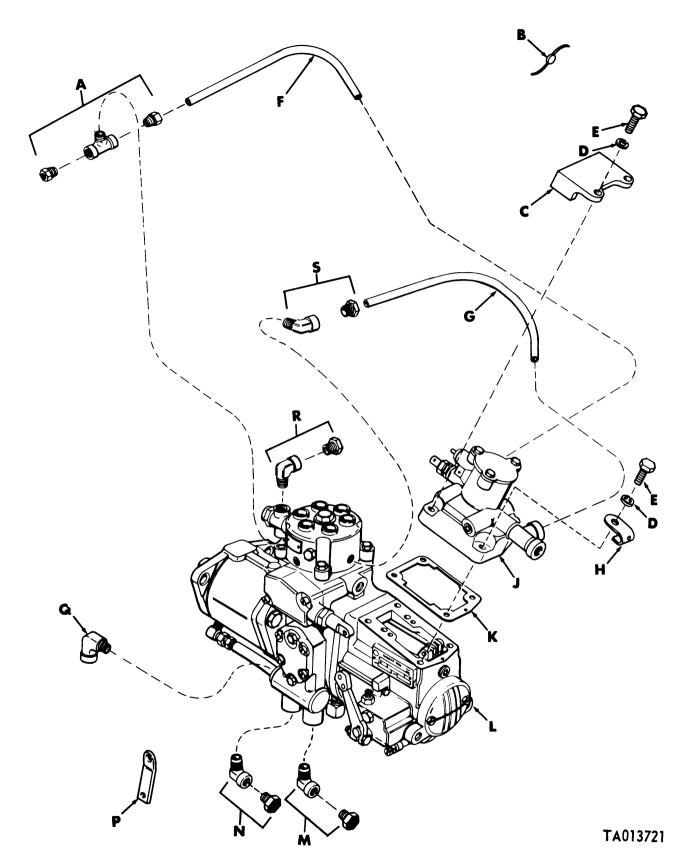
Late code F fuel injection pump assembly, partial exploded view.
